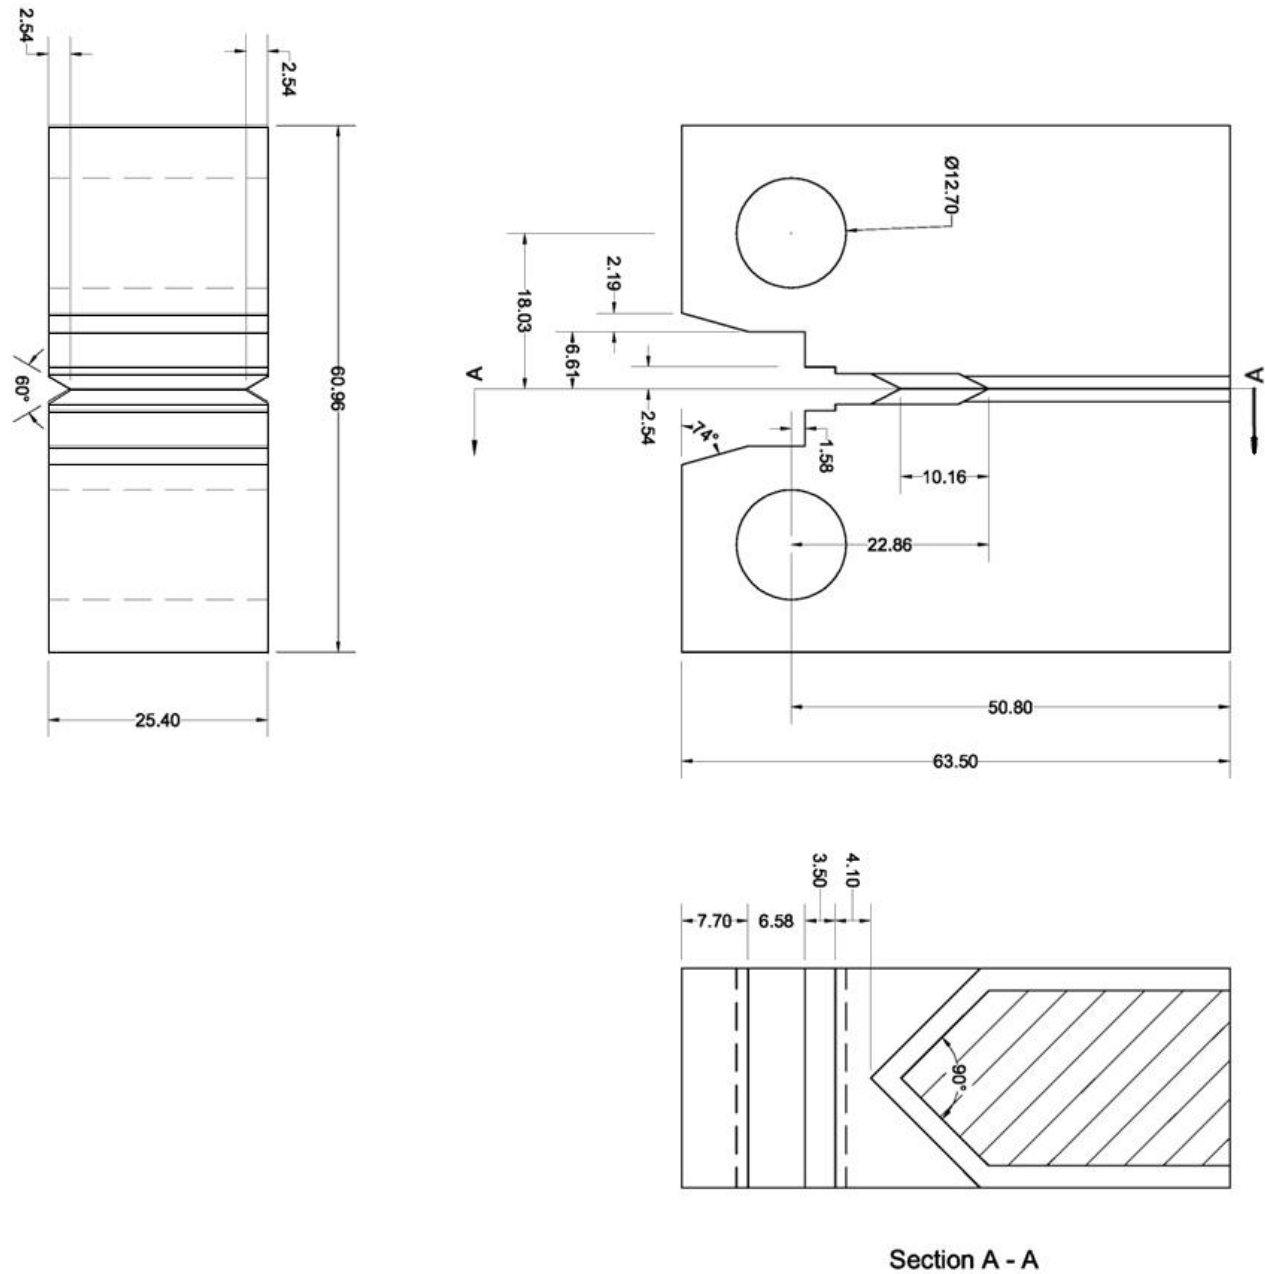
Technical drawing of the J_{IC} specimen used in this study
